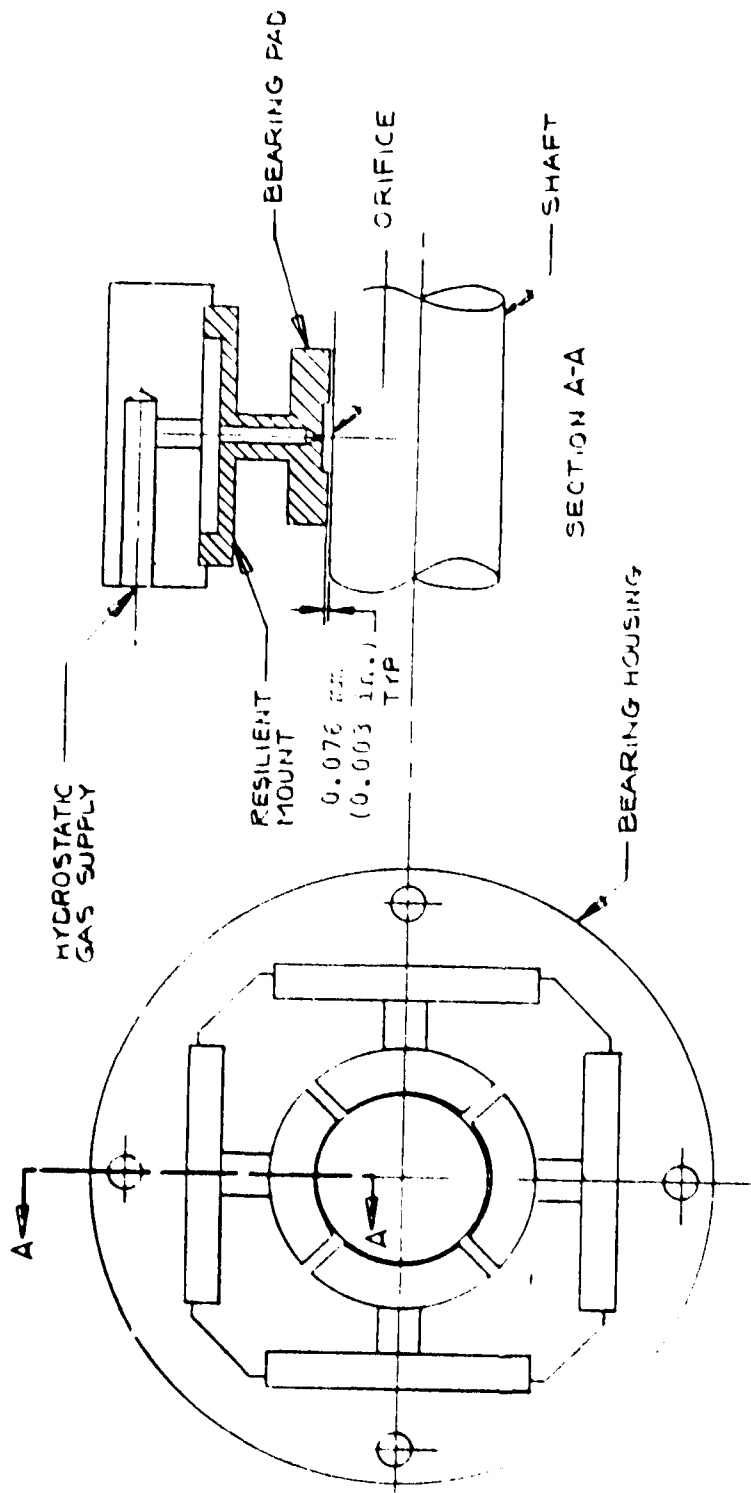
Three-lobe hydrostatic gas journal bearing.
